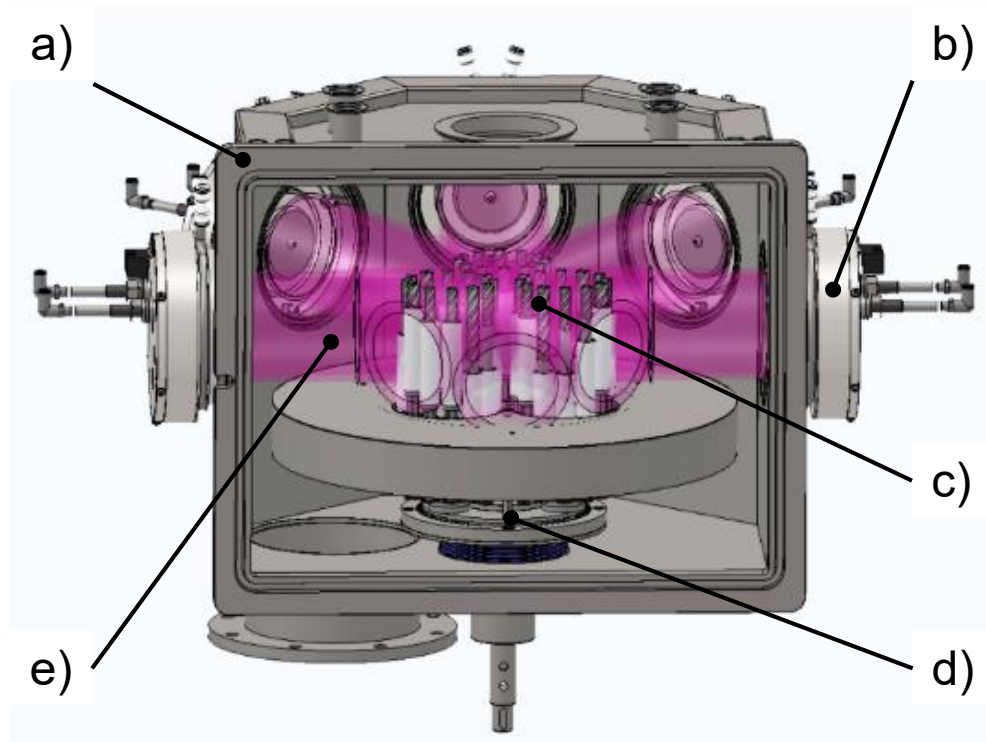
RIBE experimental setup for tool de-coating: (a) vacuum chamber; (b) CDIS; (c) processed cutting tools; (d) planetary rotation system; (e) simulated ion beam, pink colored
